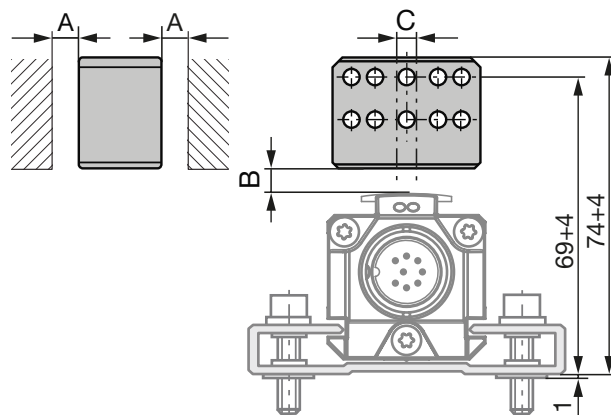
Dimensions and distances with BTL6-A-3800-2 magnet
